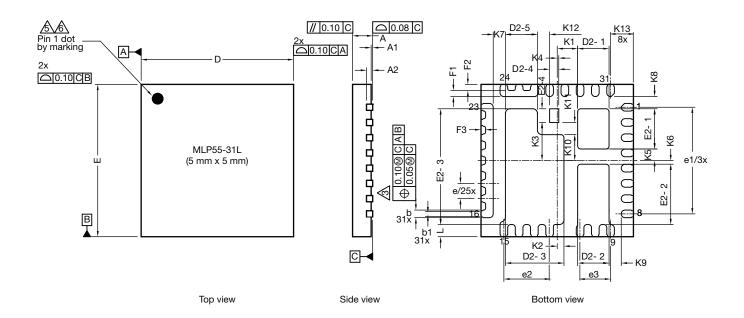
Multi - Phase VRPower Layout Bottom View
